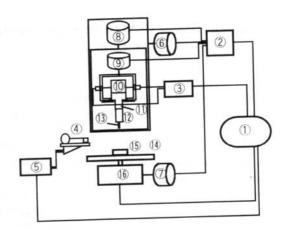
Micro-USM achieved by fabricating microtools on the machine.
